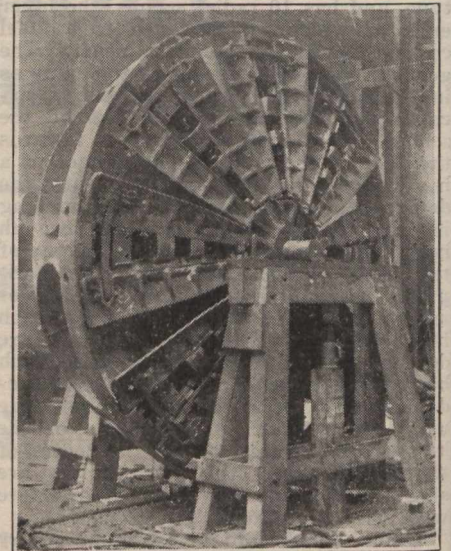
C.P.R. Heavy Rotary Snow Plough Wheel, being balanced.
